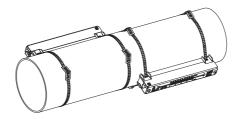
Transducer mounting fixture Variofix L (diagonal arrangement)
